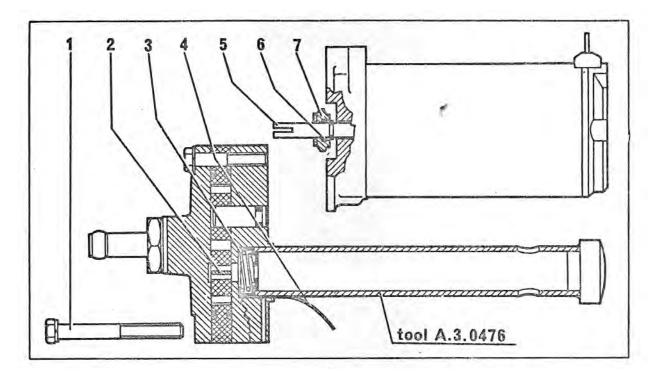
REPLACING THE ROTATING SEAL OF THE ELECTRIC PUMP
